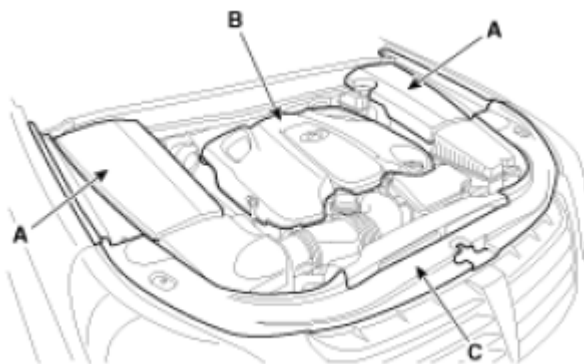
Identifying Engine Room Cover, Engine Cover And Radiator Grill Upper Cover
